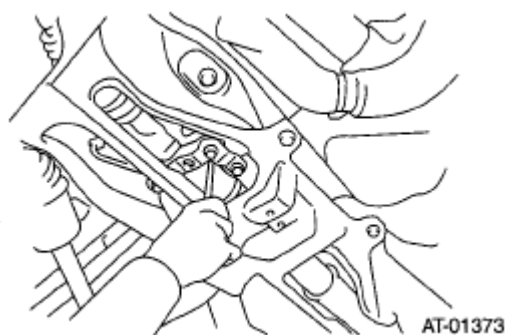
Installing Clutch Housing Cover Securing Bolts (1 Of 2)
